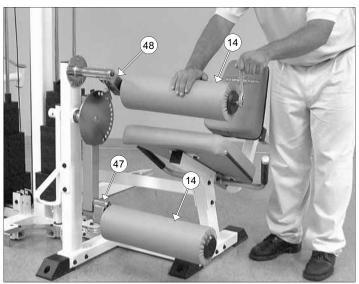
Next, attach two Foam Rolls 2 X 5 1/2 X 18 (#14) to the Top Adjustable Leg Holder Tube (#48) and the Swivel Foam Roll Tube (#47) using two Button Head Socket Cap Screws 3/8-16 X 1 (#71), two Split Lock Washers 3/8" (#152), and two Aluminum Washers 3/8 X 2.584 OD (#68).
